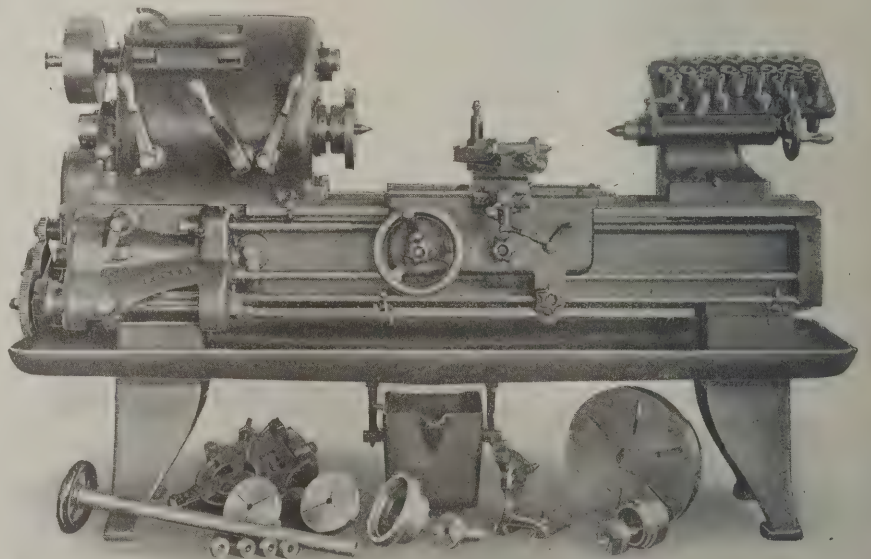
Front View of Pratt & Whitney Single Pulley Gear-driven Lathe.
